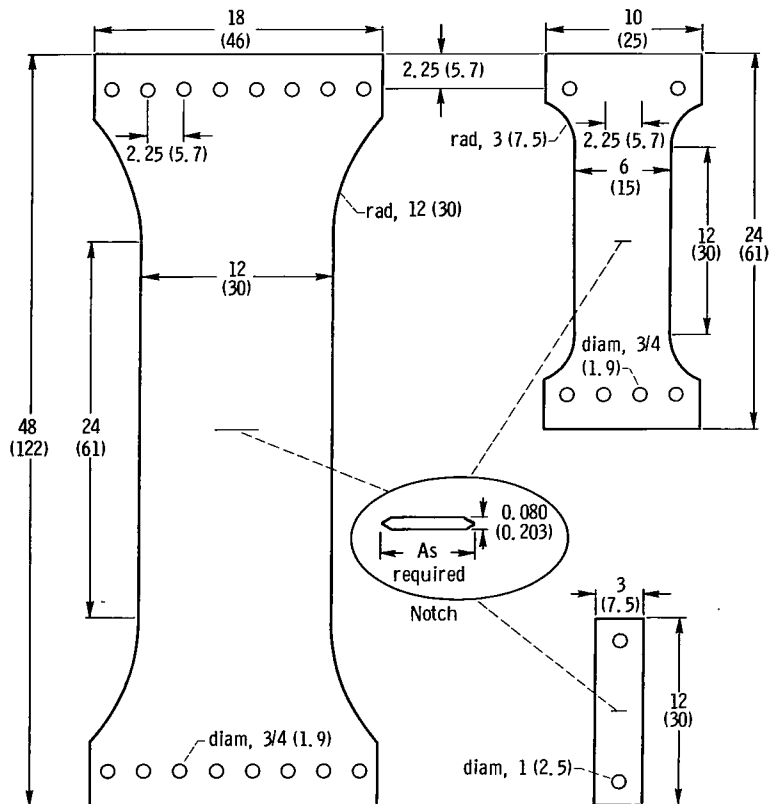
Fracture toughness specimens. Notch root radii, 0.0005 inch maximum (0.0013 cm). (Dimensions in inches (or centimeters)).
